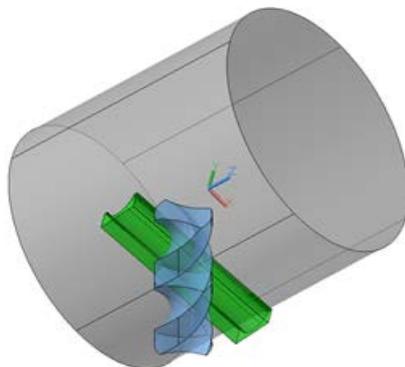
Accession of the surface of the tool lath to model of billet of the tool.
